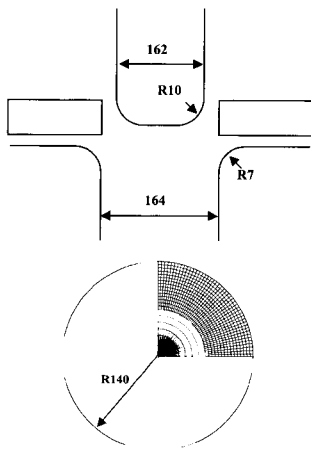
Tool and mesh for the analysis of cylindrical cup deep drawing process
